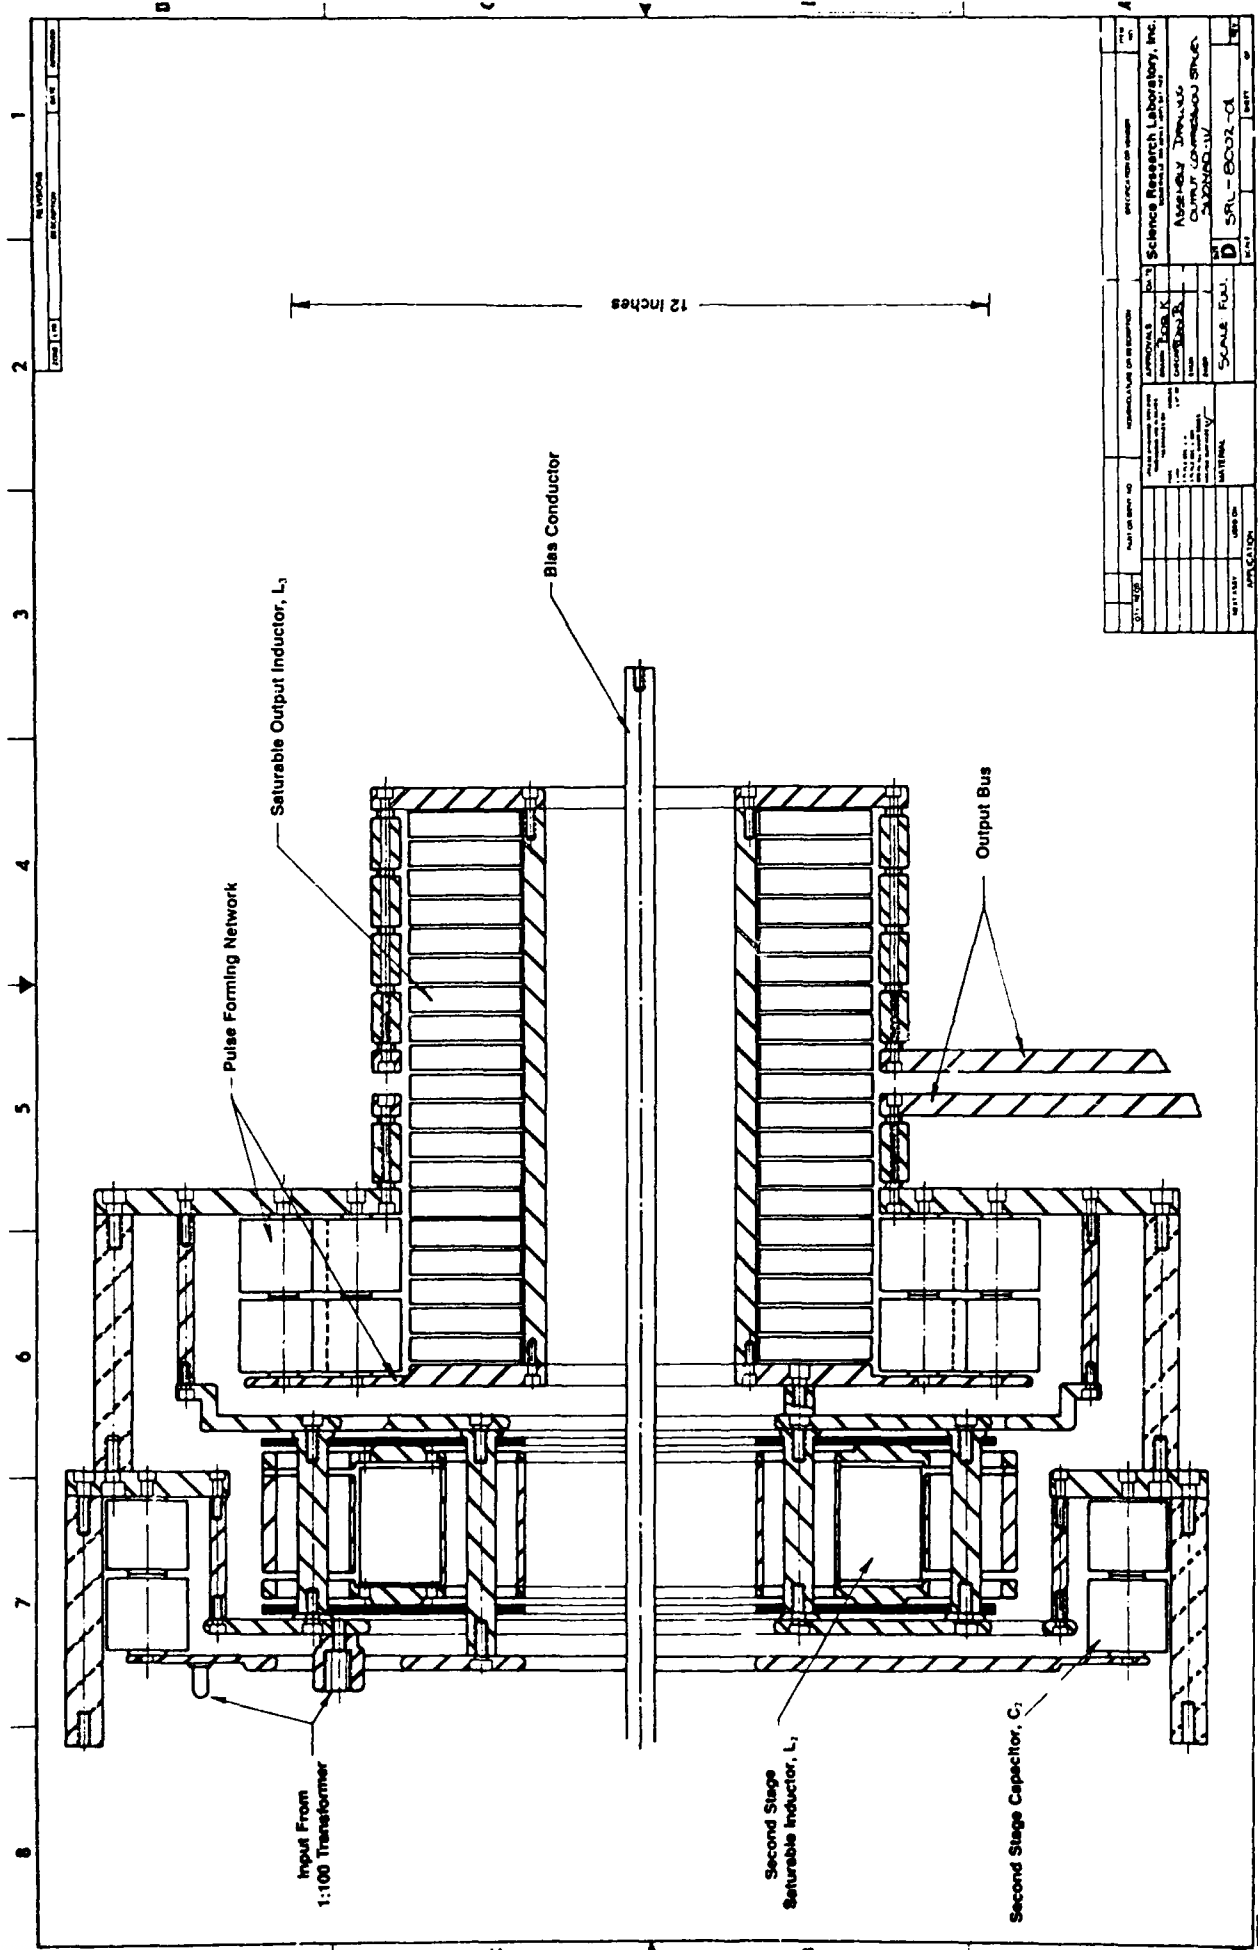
Assembly drawing of SNOMAD-IV second compression stage, PFN and output stage.
